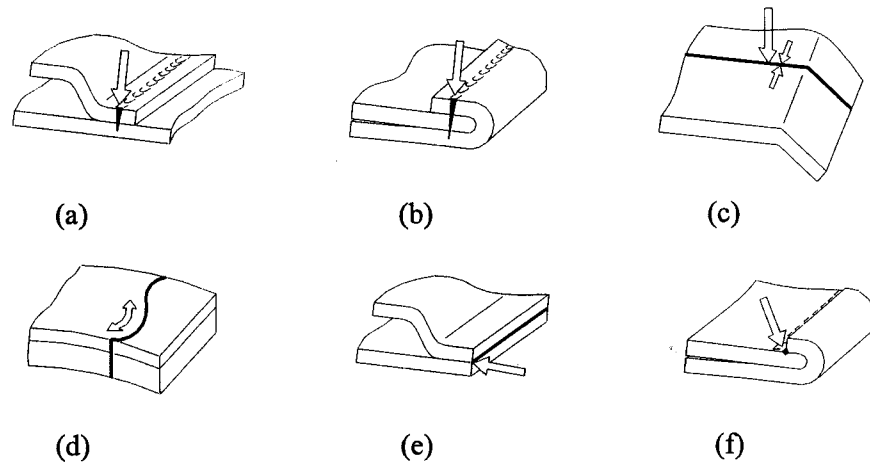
Typical laser welding joints for car body parts (Benzinger, 1990)
